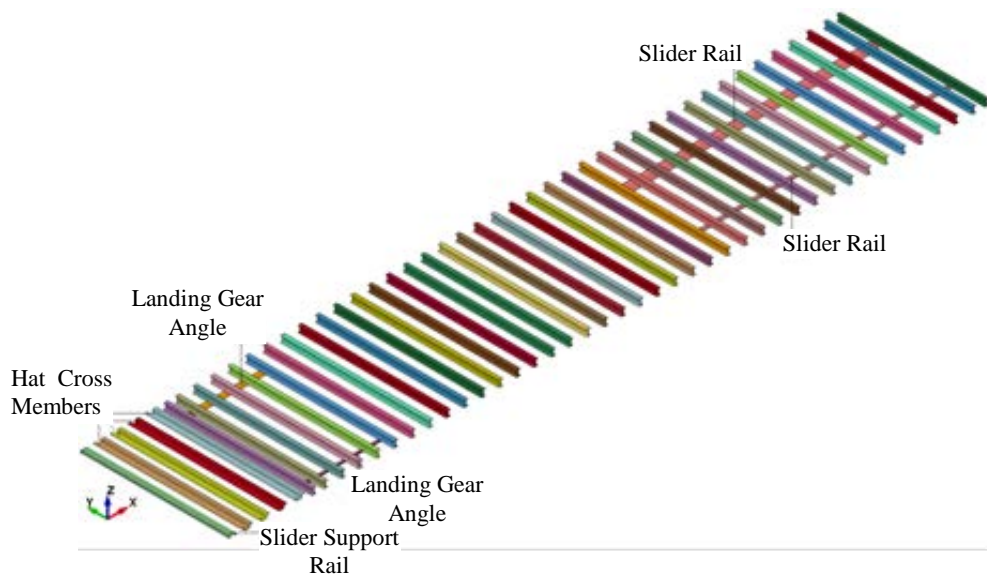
Finite Element Model for Floor Cross Members and Supporting Rails.
